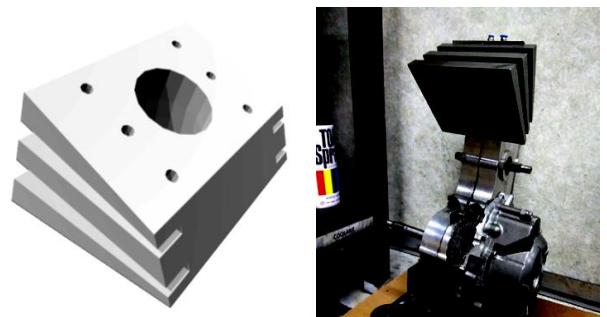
Prototype of existing Crank Rocker Engine and cooling system
